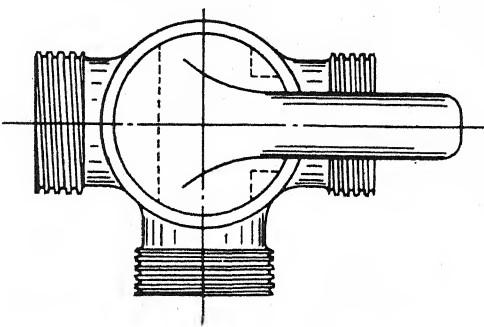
Plug valve for feeding two systems at once. (Courtesy Tri-Clover Machine Co., Kenosha, Wis.)
